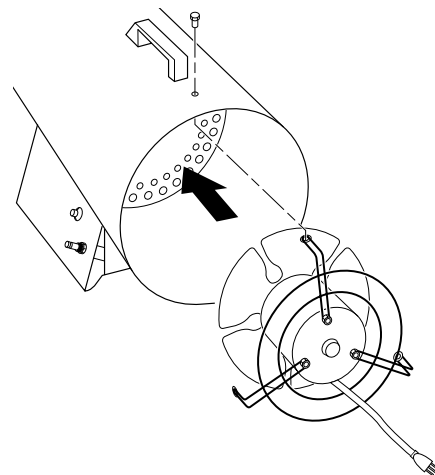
Removing or Attaching Fan Guard from Motor
